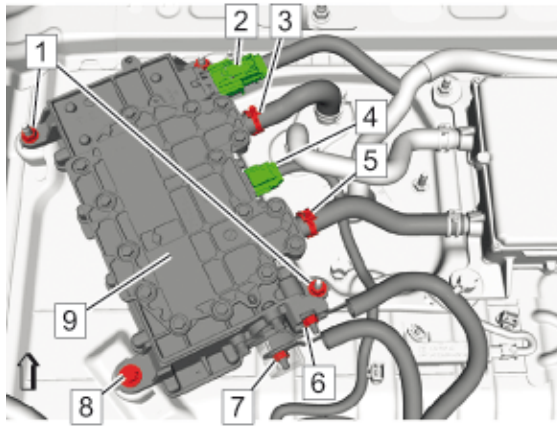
Accessory DC Power Control Module, Bolt, Nuts, Coolant Hoses, Clamps And Electrical Connectors
